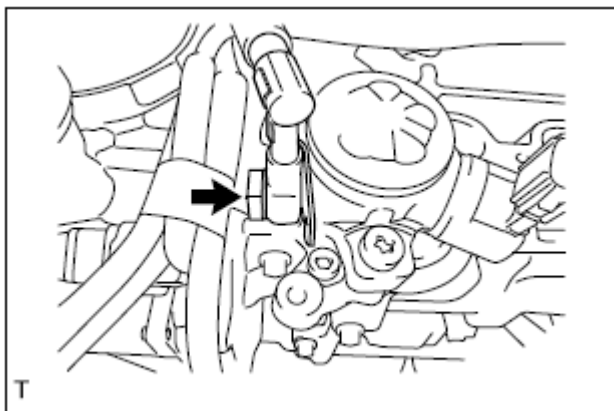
Identifying Fuel Delivery Pipe Sub-Assembly Union Bolt
